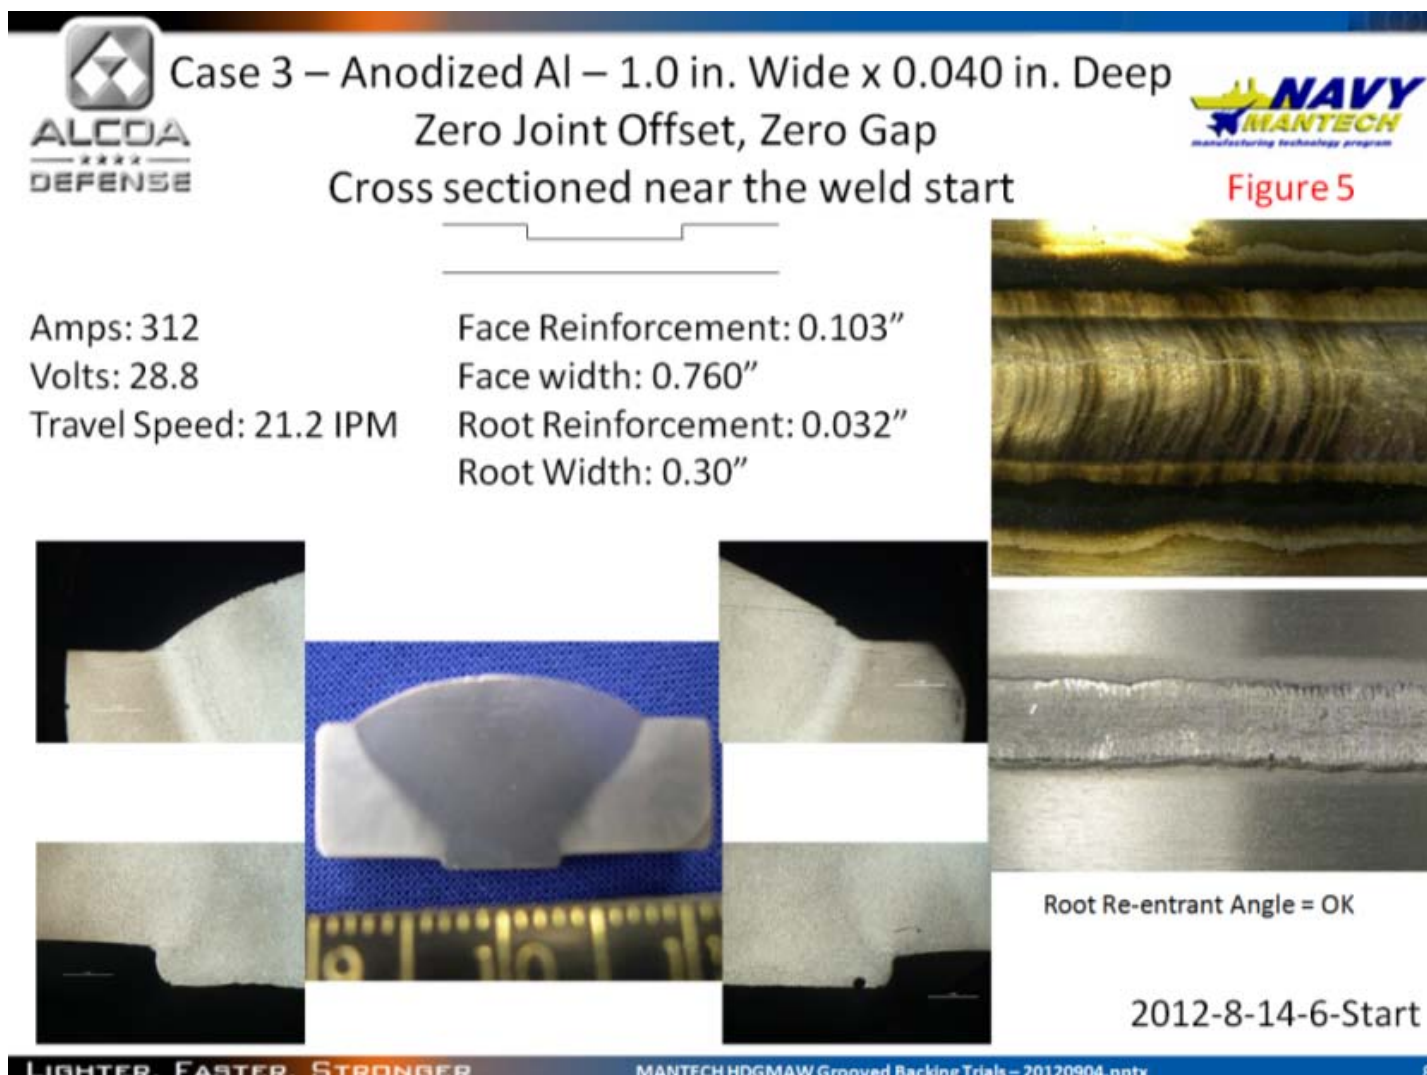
Case 3 – Anodized Al – 1.0 in. Wide x 0.040 in. Deep Zero Joint Offset, Zero Gap Cross sectioned near the weld start
